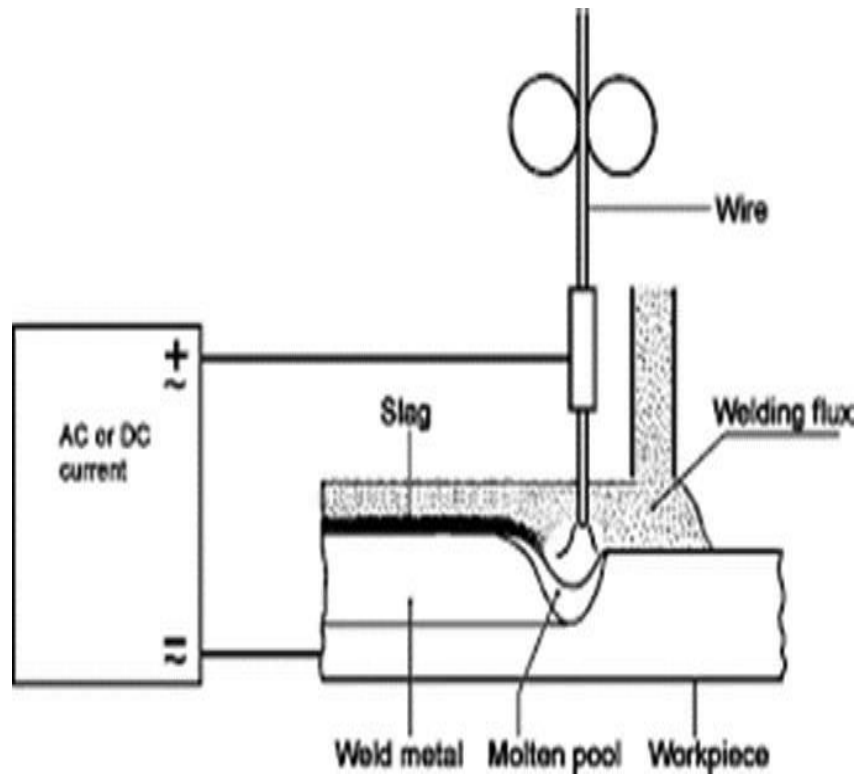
1 Schematic diagram of submerged arc welding
